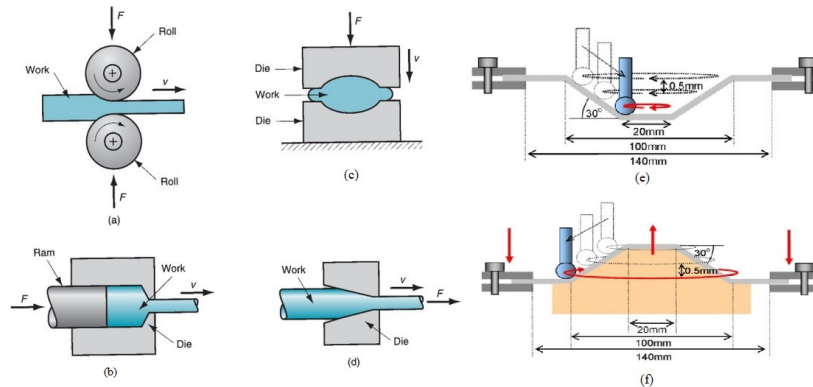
Schematic of (a) rolling (b) forging (c) extrusion and (d) drawing [48]
